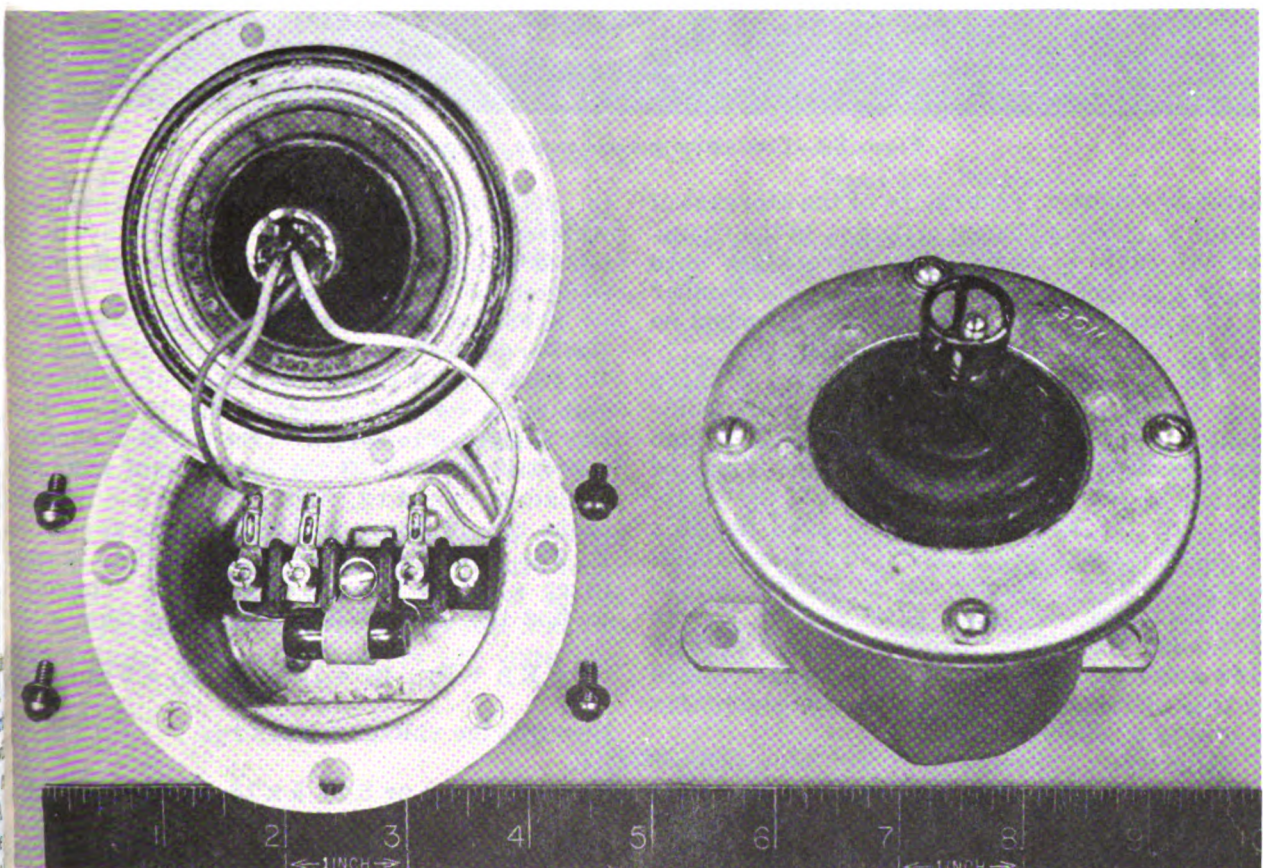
Assembly and disassembly view of thermostats type IC/J-125.
